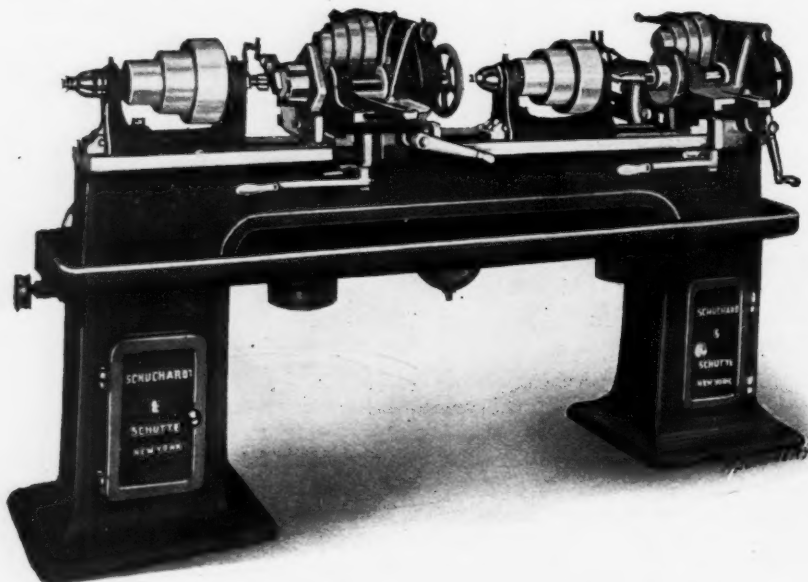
Schuchardt & Schutte Duplex Automatic Profile Milling Machine
